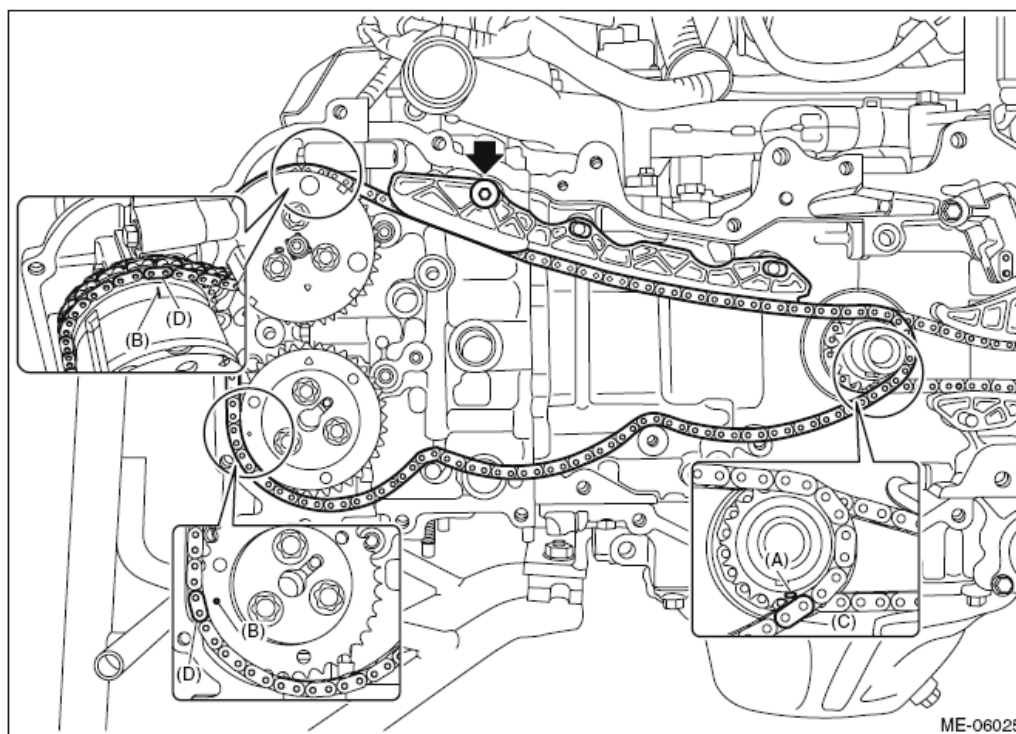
Locating Alignment Marks Of Intake And Exhaust Cam Sprocket
